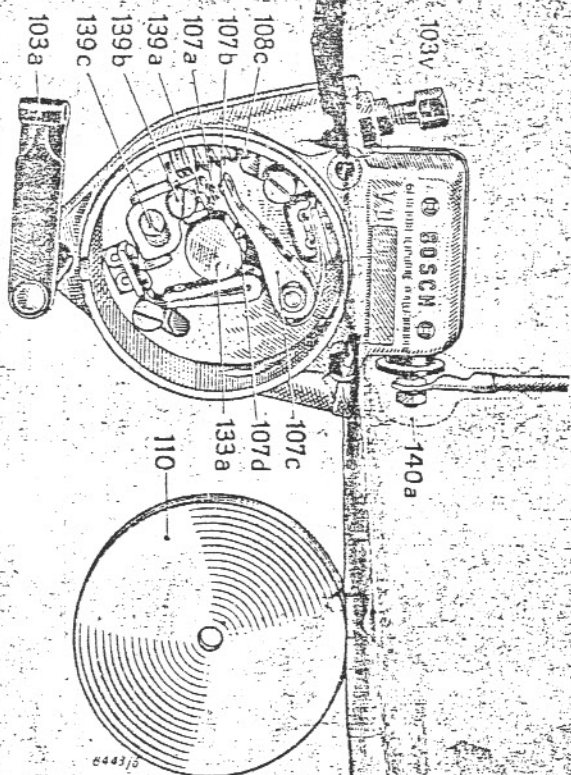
Contact breaker VU1C (for single cylinder engines); end cap removed
